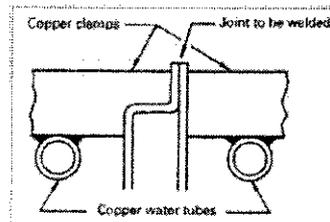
A water-cooled jig for rapid removal of heat when welding sheet metal.
